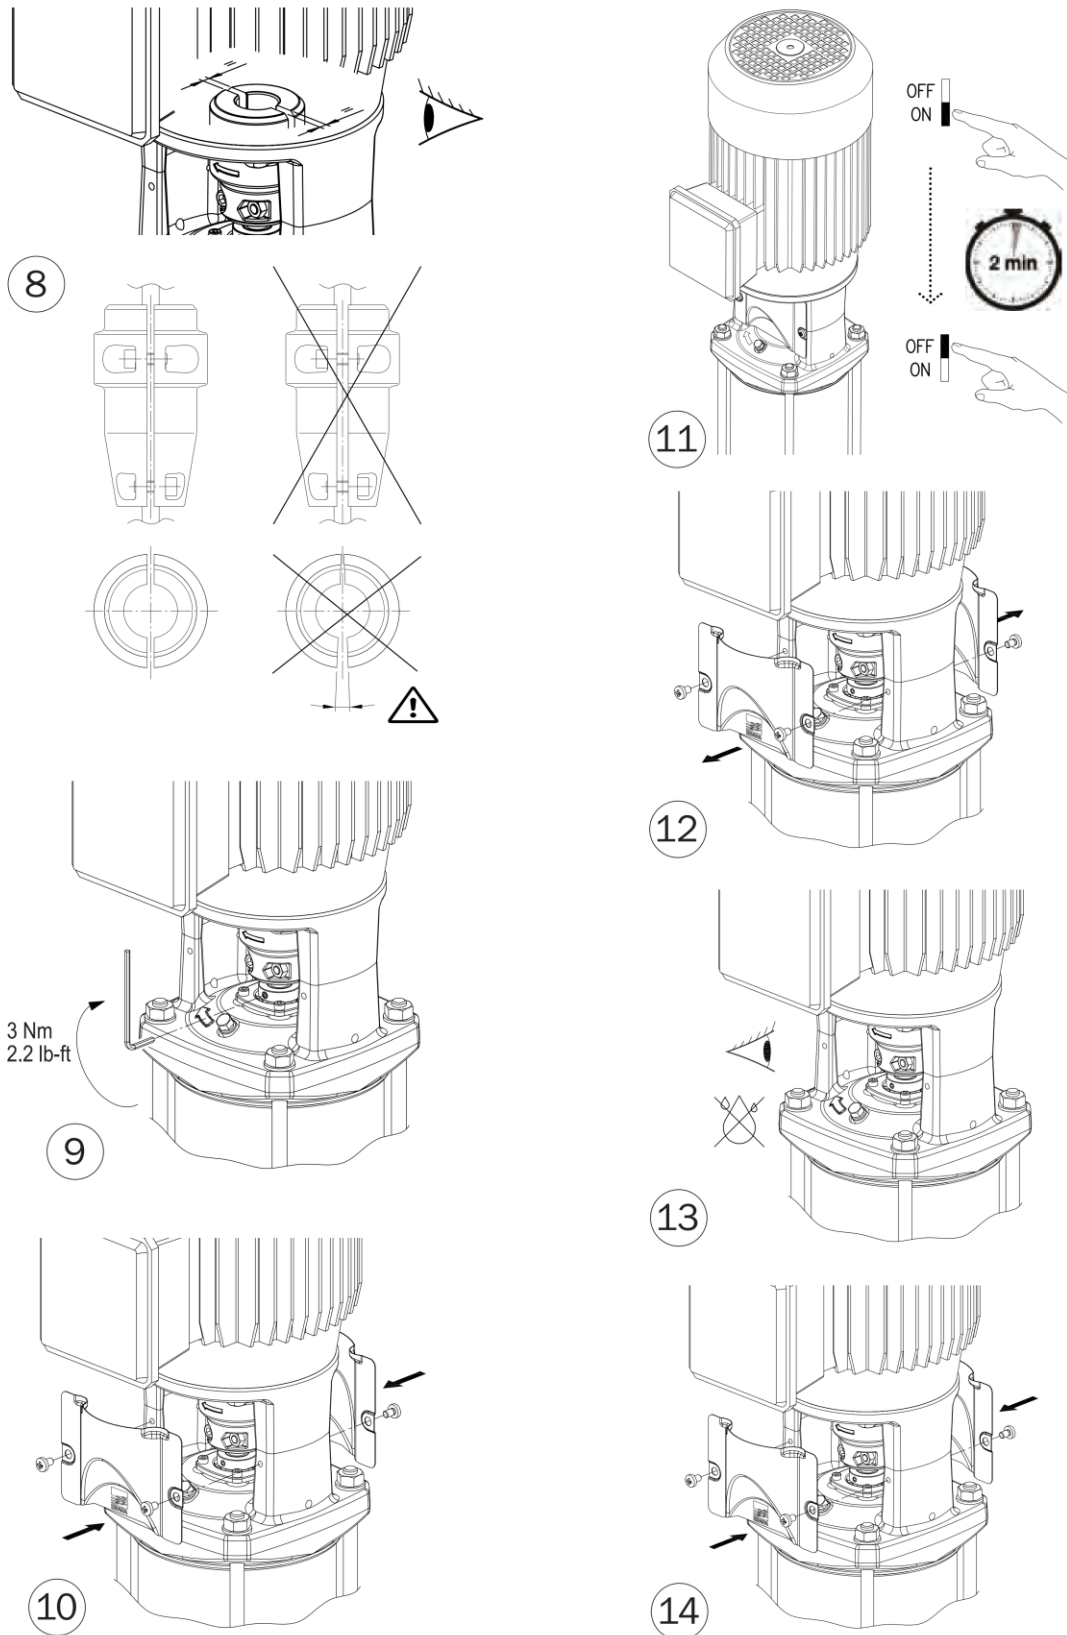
Assembling the Motor to the Pump – RSVS1 to RSVS20 [-A-](Sheet 2)
